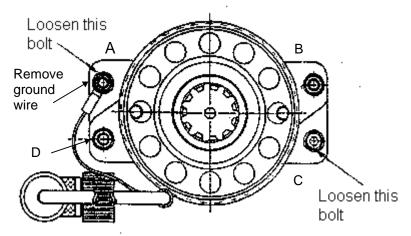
Powered Bolt - Top View (with Actuator Removed)
